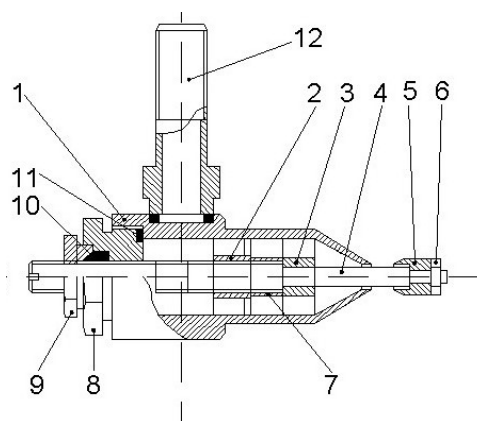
The axial air-jet sonic generator: 1 – air nozzle; 2, 3 – cross support; 4 – rod; 5 – resonator; 6 – screw-nut; 7 – sleeve; 8 – cover; 9 – locking nut; 10 – gasket; 11, 13 – ring; 12 – fitting.
